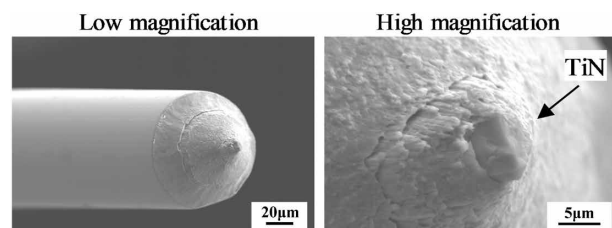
Fracture surface of extra-fine wire starting from TiN
